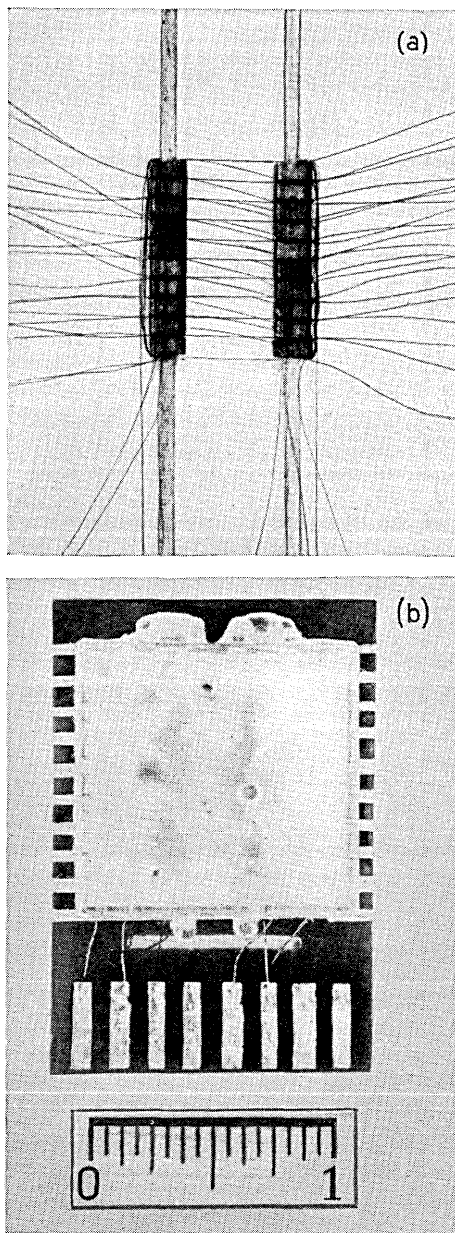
(a) Ten-bit shift register cores assembled on jig. There are ten parallel inputs on the left-hand side, and ten parallel outputs on the right-hand side. The clock windings run parallel to the jig rods. (b) Register mounted on printed circuit card and potted.
